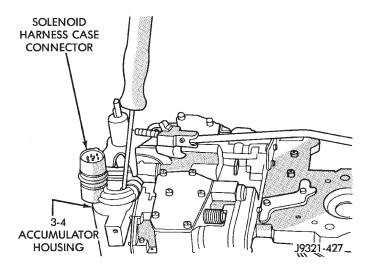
Solenoid Harness Case Connector Shoulder Bolt
